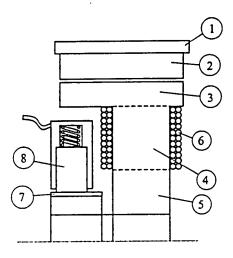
Axial sectional view of a Permanent Magnet Direct Current motor with a reduced axial length
